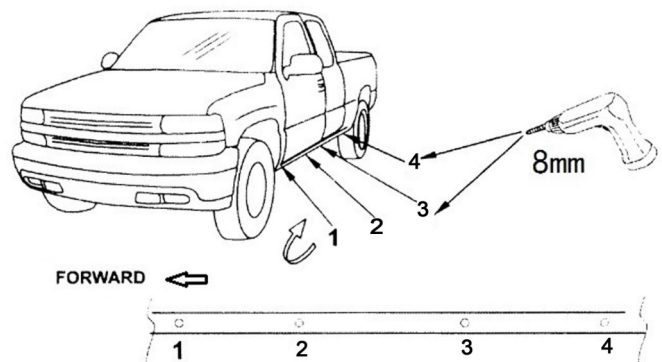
Driver Side 1st and 2nd Mounting Bracket Installation
